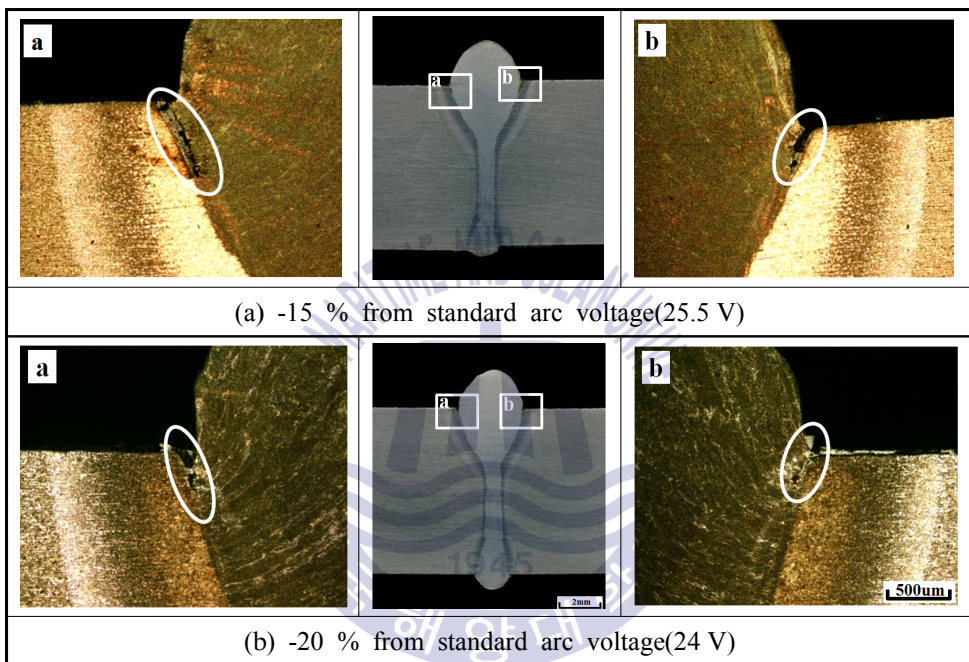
Morphologies of welding defects(undercut) according to reducing the arc length by controlled arc voltage
